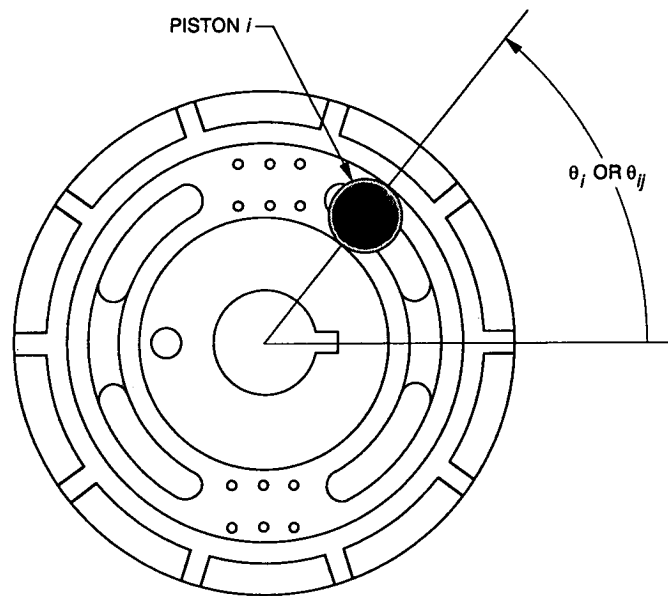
The valve plate sealing surface of a bent-axis hydraulic piston motor and the piston angle relative to the valve plate.
